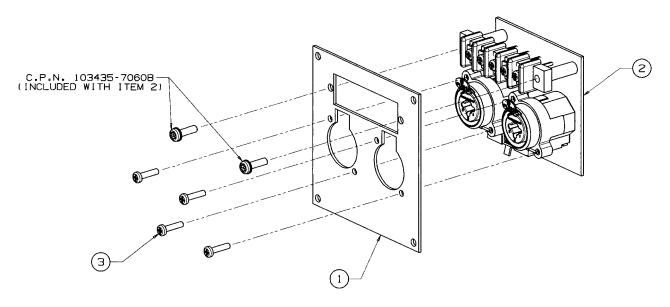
CE4000 Standard Input Assembly (Exploded View)
